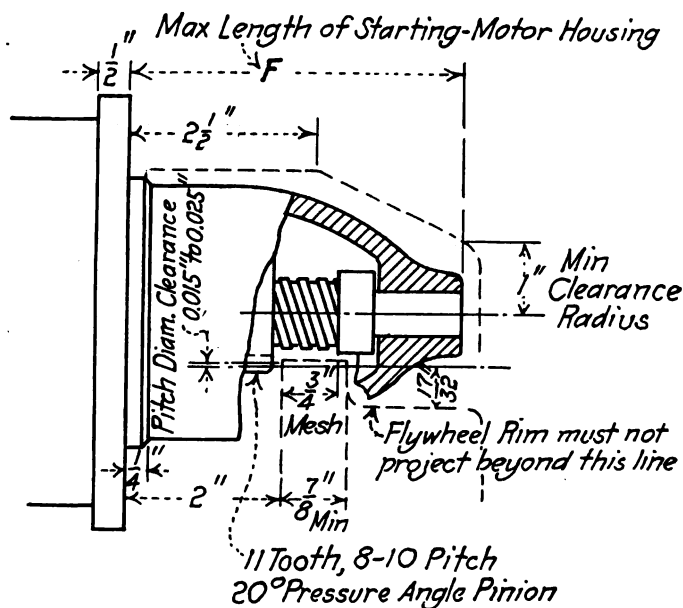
PROPOSED MOUNTING DIMENSIONS FOR STARTING-MOTOR FLANGE
